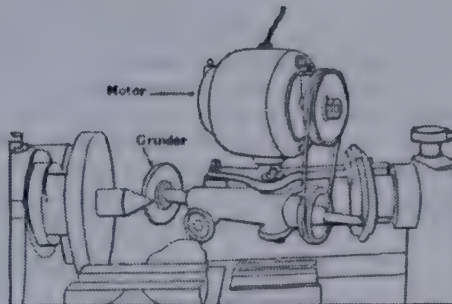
Motor Driven Grinding Attachment for a Lathe, to be used for dressing tools, grinding centers and taper.
